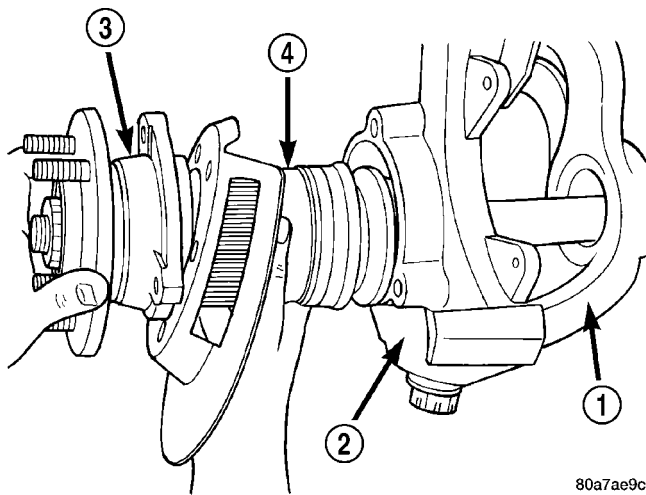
HUB BEARING AND AXLE ASSEMBLY
